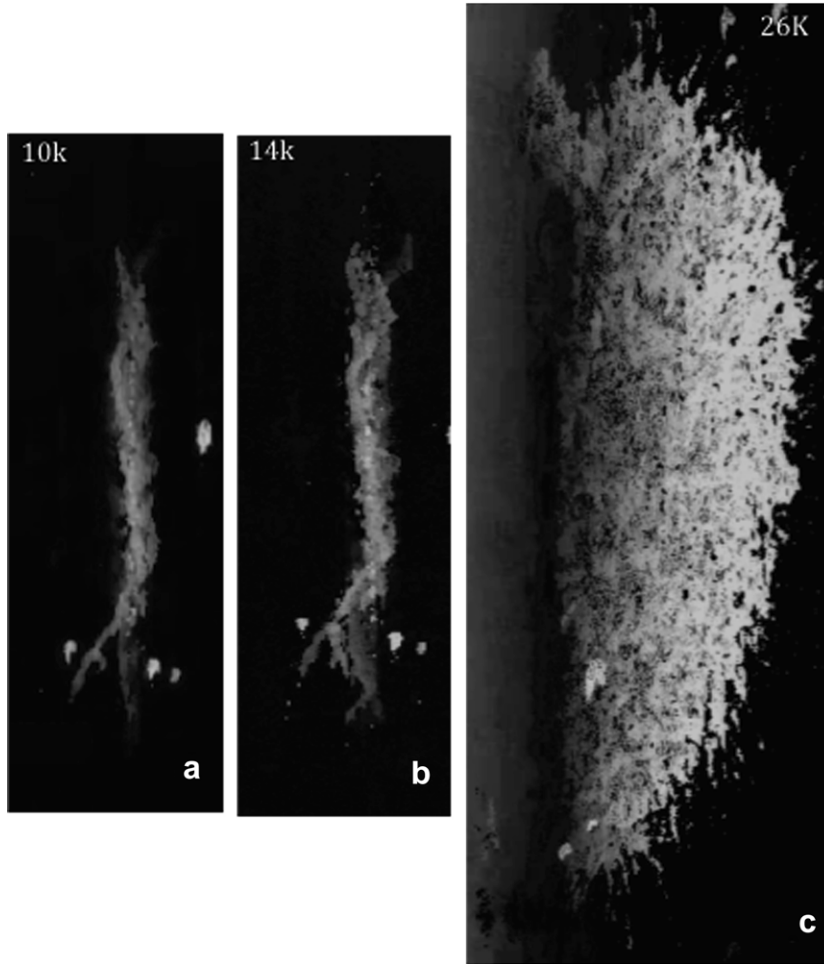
Rotated 3D tomographs were taken at (a) 10,000, (b) 14,000 and (c) 26,000, showing crack bifurcation at both sides of the crack front.
